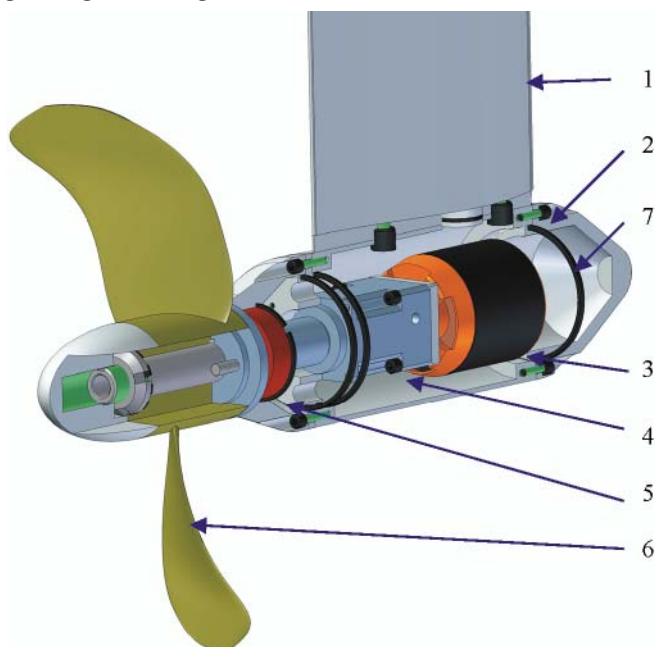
Cross section through the propeller: 1 – rotating column; 2 – pod; 3 – electric motor; 4 – planetary gear; 5 – rolling bearing; 6 – constant pitch propeller; 7 – O-ring
